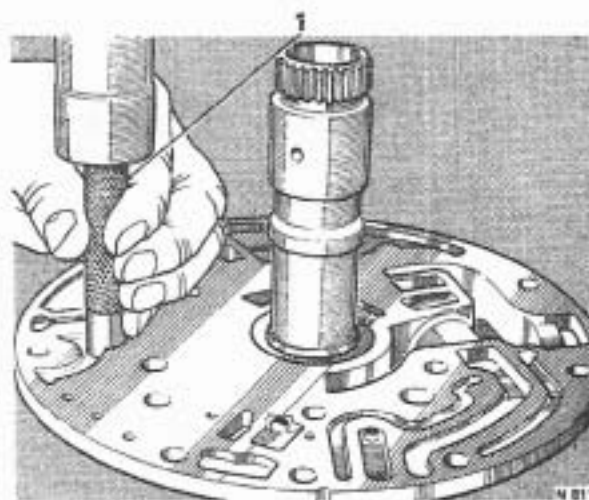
FITTING THE BY-PASS VALVE SEAT
